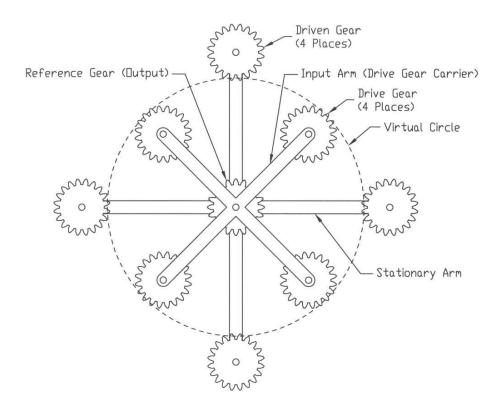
Embodiment with Equal Number of Drive and Driven Gears
